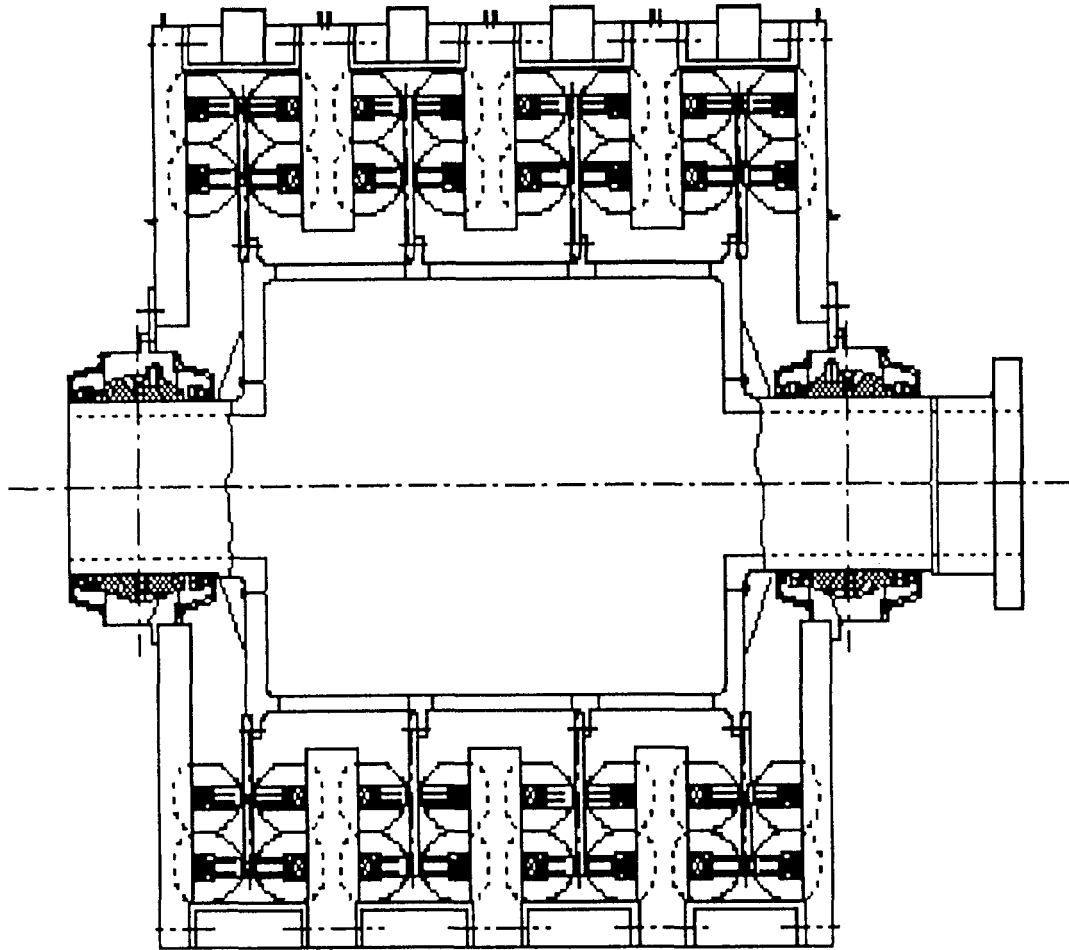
MECHANICAL LAYOUT OF THE 20 MW TFM
